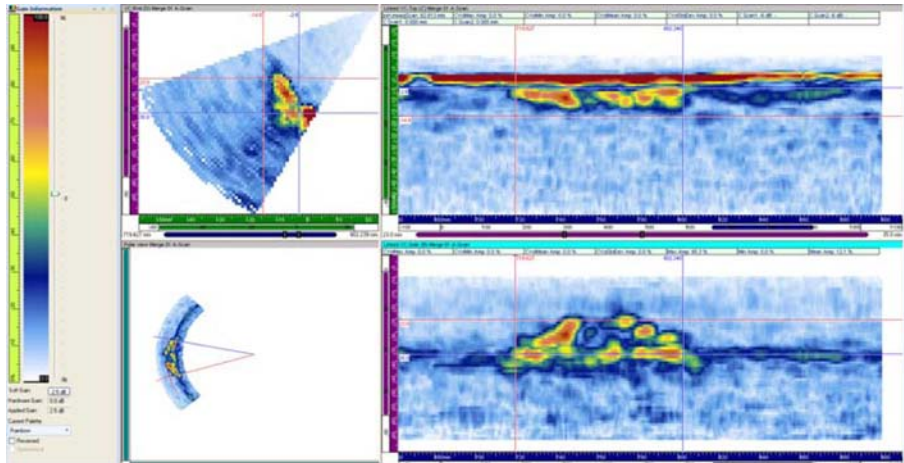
Specimen 9C-034 Flaw 1 After Weld Crown Removal at 1.5 MHz, Line Scan Data
